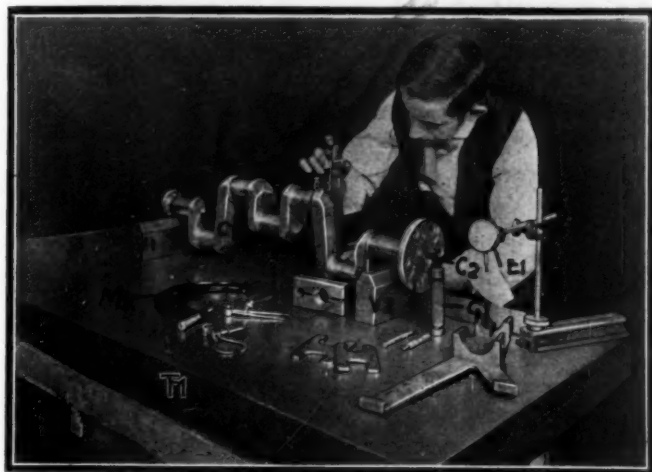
Inspecting crankshafts in the Packard plant, using micrometers, fixed gauges, and extensometers under proper conditions
